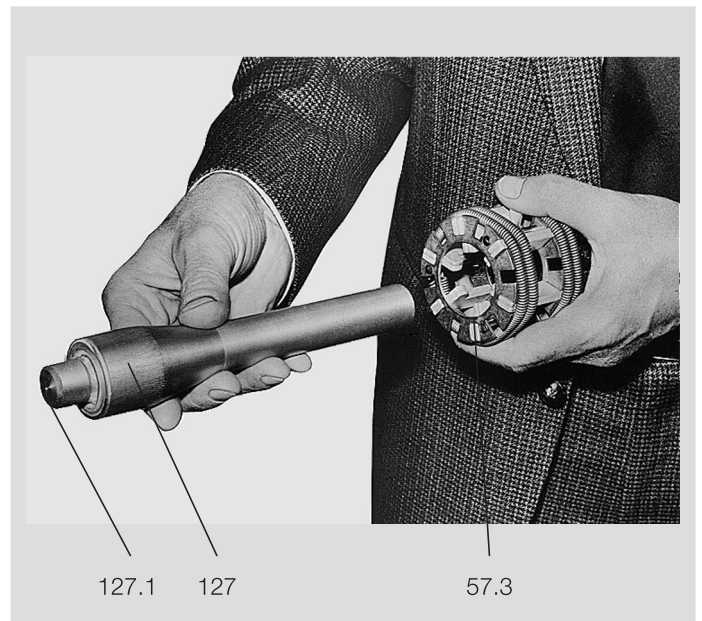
/7: Vacuum circuit-breaker, type VD4, on withdrawable part. Sliding the contact system onto the auxiliary arbor with the rear end first and moving it up to the thicker shaft area, here for 1600 A
